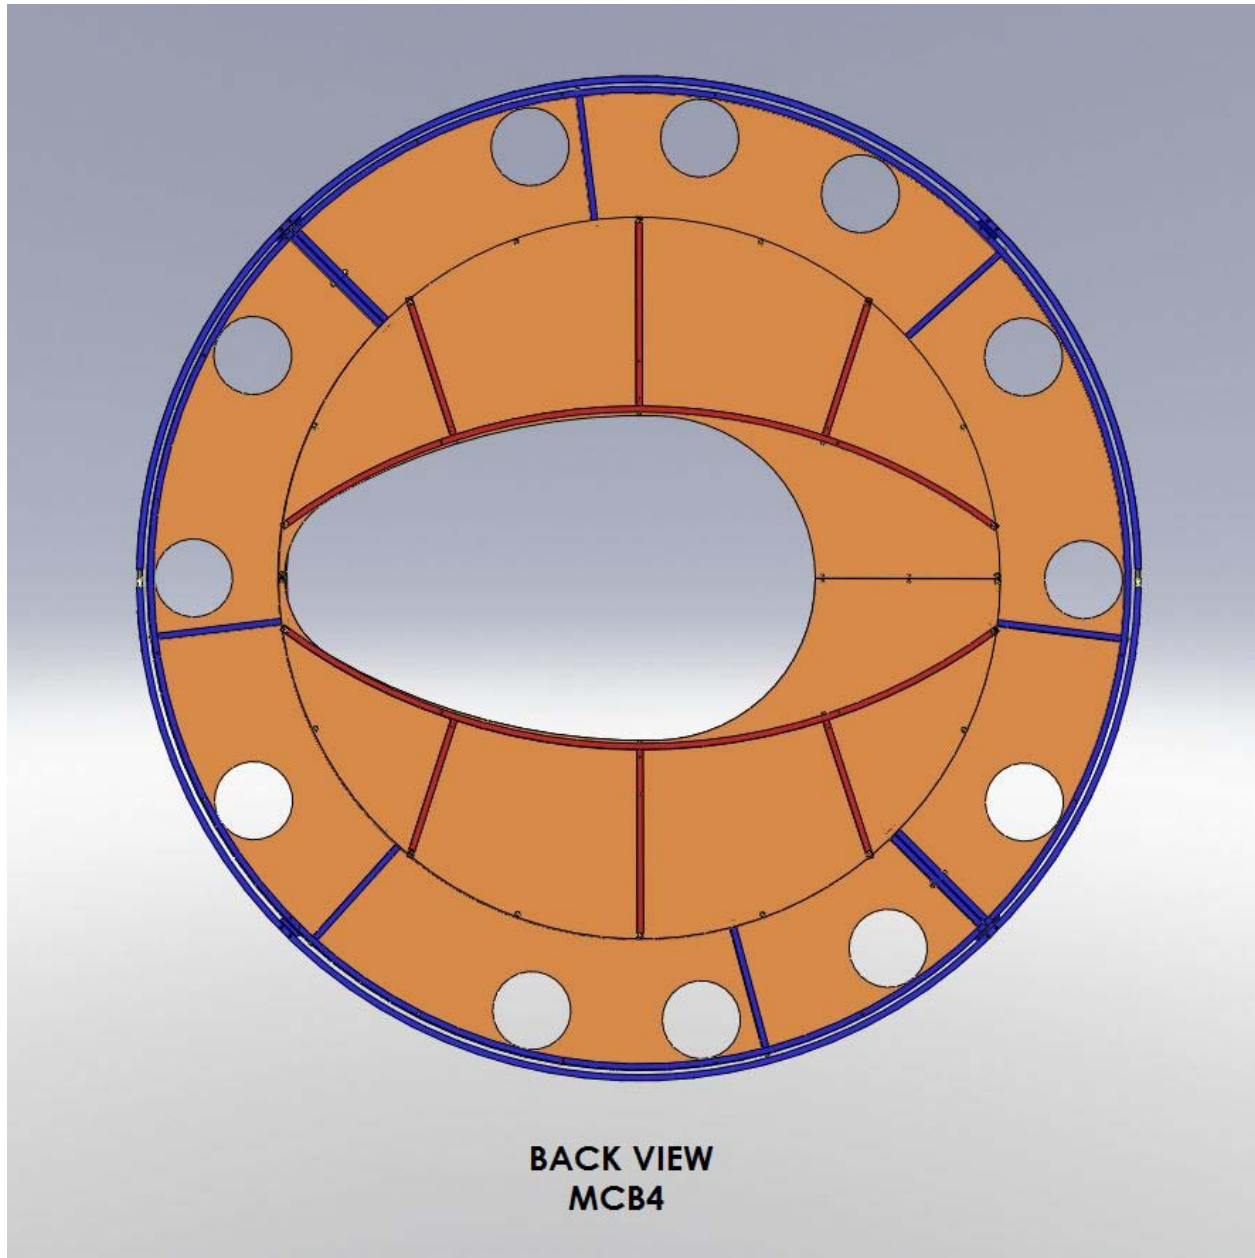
Back View of MCB4 Mode Cleaner Tube Baffle
